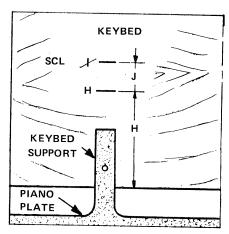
Measure dimension H, mark and label the Keybed as shown.
